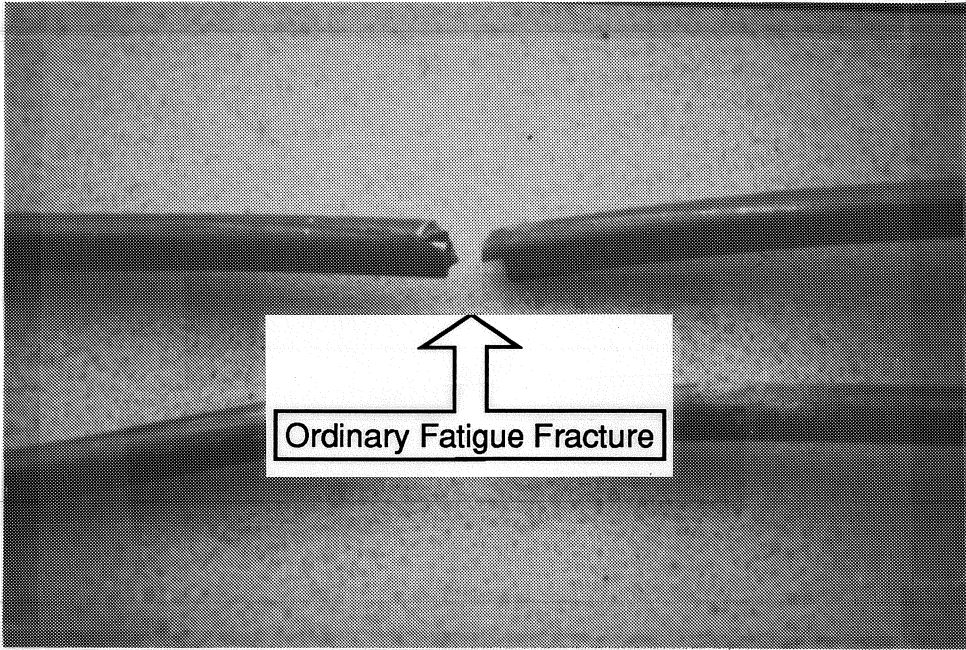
Photograph of an Ordinary Fatigue Fracture
